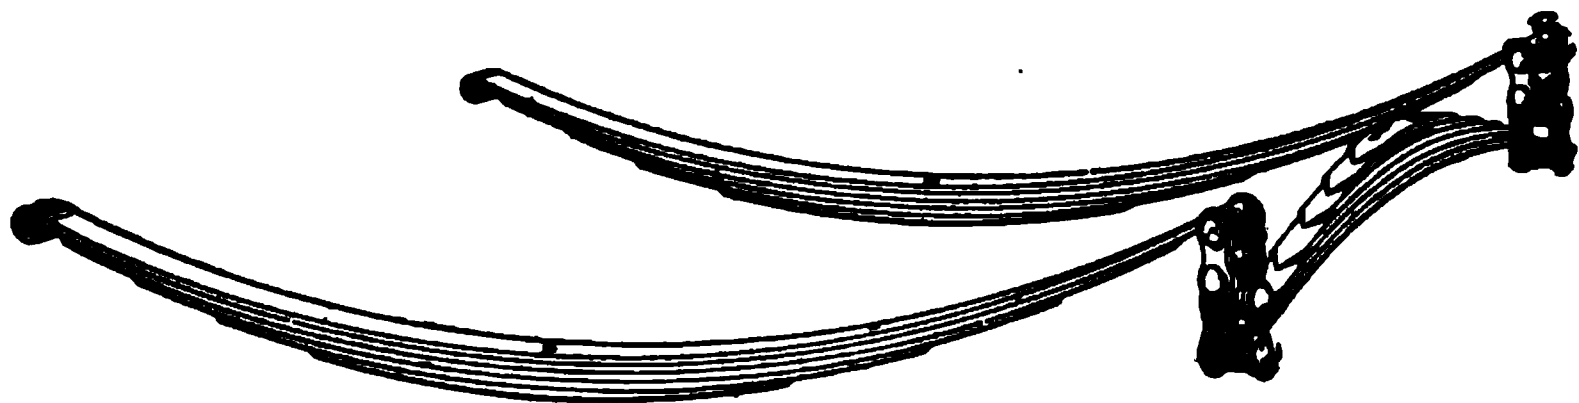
Platform Springs, Showing How Side- and Cross-Springs Are Shackled Together
